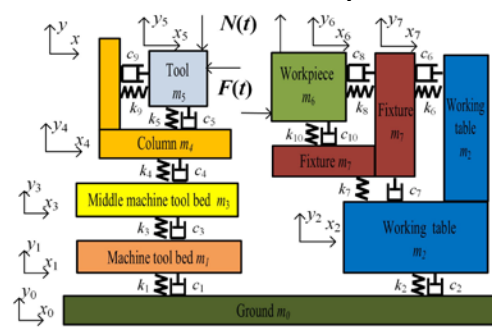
Dynamic physical model of "Machine-Tool-Workpiece" system of gear shaping
